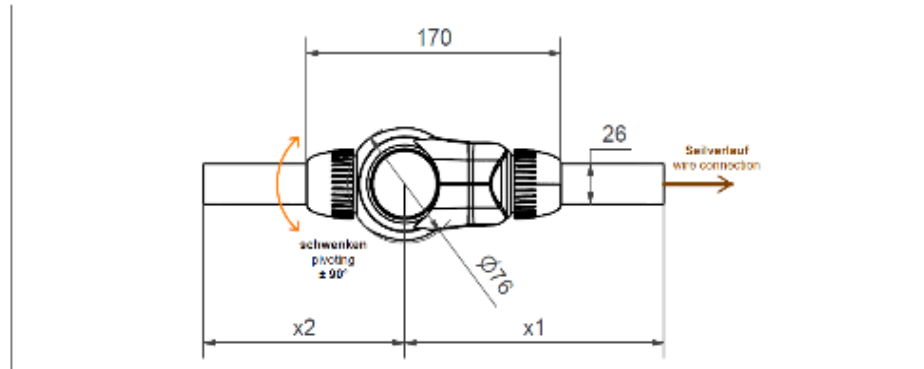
Dimensioned drawing - Swivel joint RL-50-PL1
